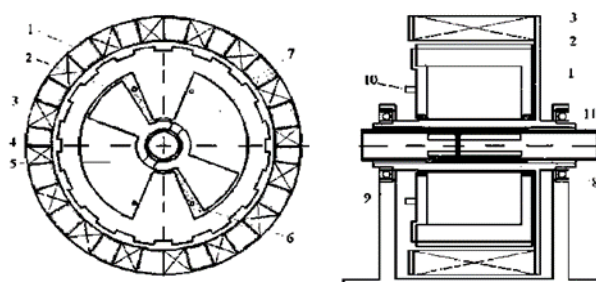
Diagram of a possible variant of electric generator based on a two-stroke rotor engine with free rotor and hull: 1-free hull with a magnetic circuit; 2 - free rotor; 3 - electrical winding; 4 - magnets; 5 - the volume filled with the working mixture; 6 - combustion of the compressed mixture; 7 - hollow shaft with windows; 8 - outlet valve window; 9 - inlet valve window; 10 - spark plug; 11 - fixed shaft with distribution windows
